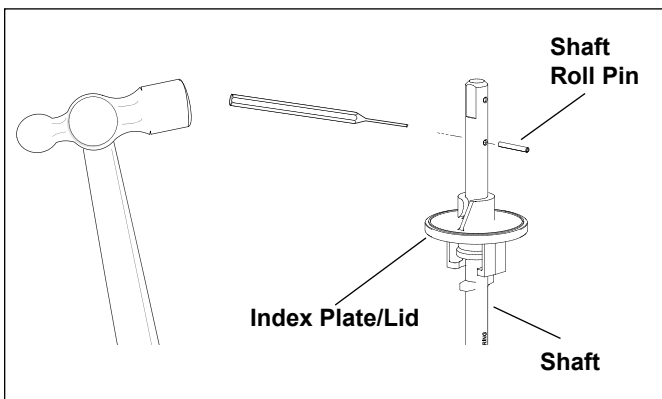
Remove Shaft Roll Pin - Top Half of Slide Valve Shaft Shown
